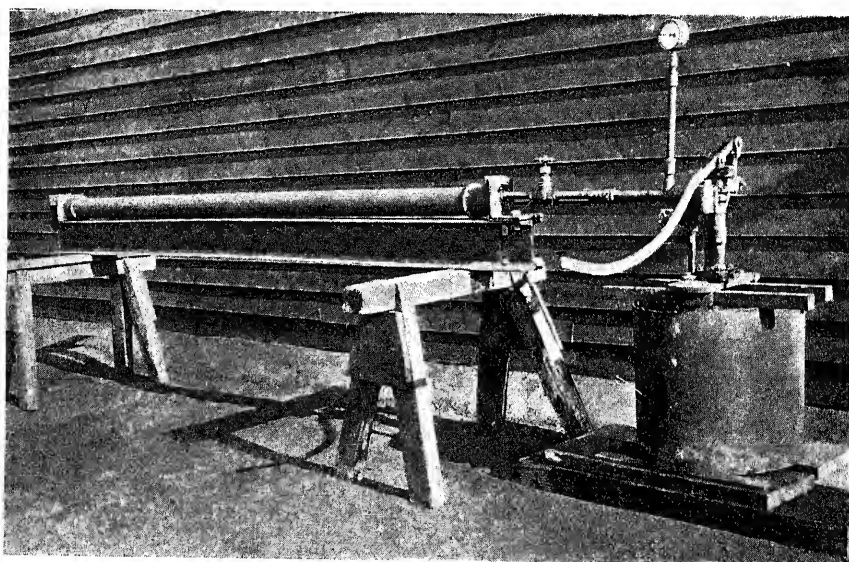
TESTING OF C.I. TUBE BY HYDRAULIC PRESSURE.
